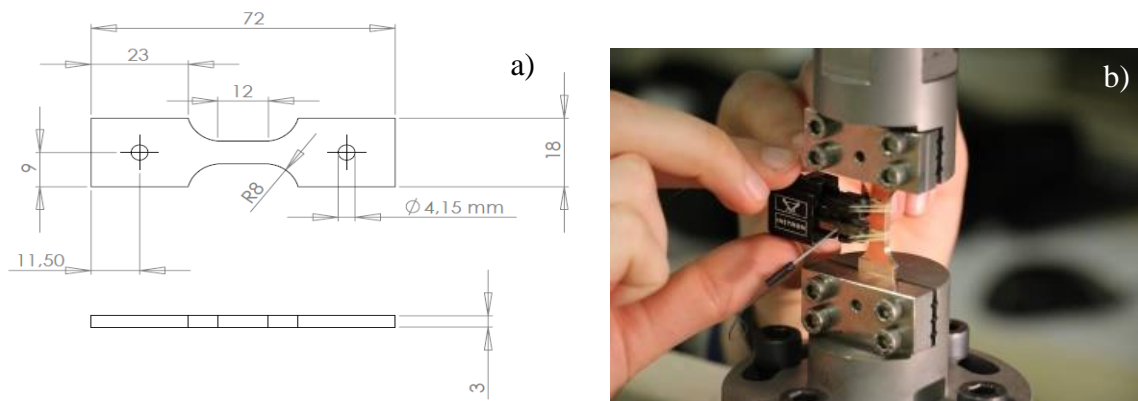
a) specimen geometry; b) extensometer mounted on the specimen installed in the fatigue machine
